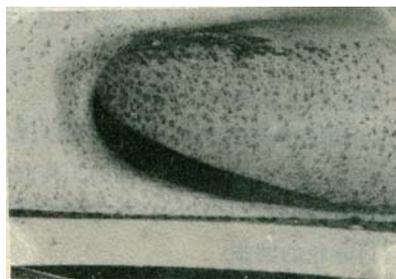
Wear on outlet edge of the impeller vane working surface Fig. 2. Wear on VIII cross section of the discharge chamber and pump tongue
